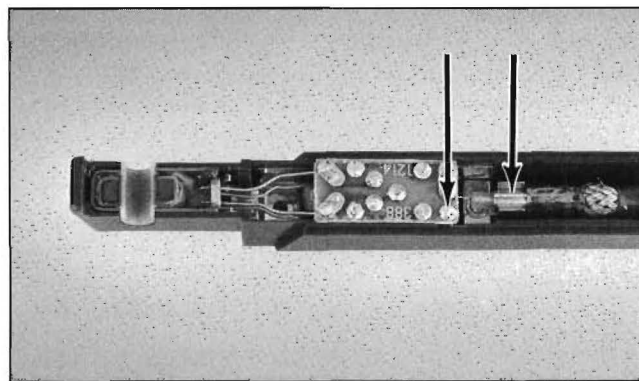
Arrows point to the two points to be unsoldered in the P6022 when removing the cable, circuit board and transformer.
